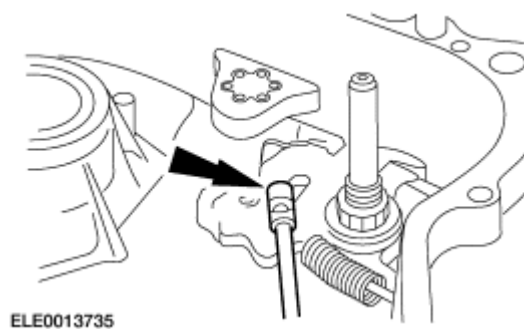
Parking Lever Actuating Rod & Parking Cam Actuator Lever Assembly
